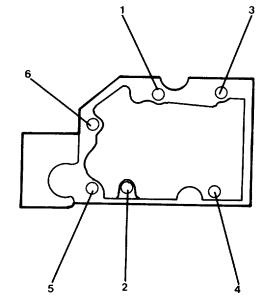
Rocker Lever Housing Tightening Sequence.
